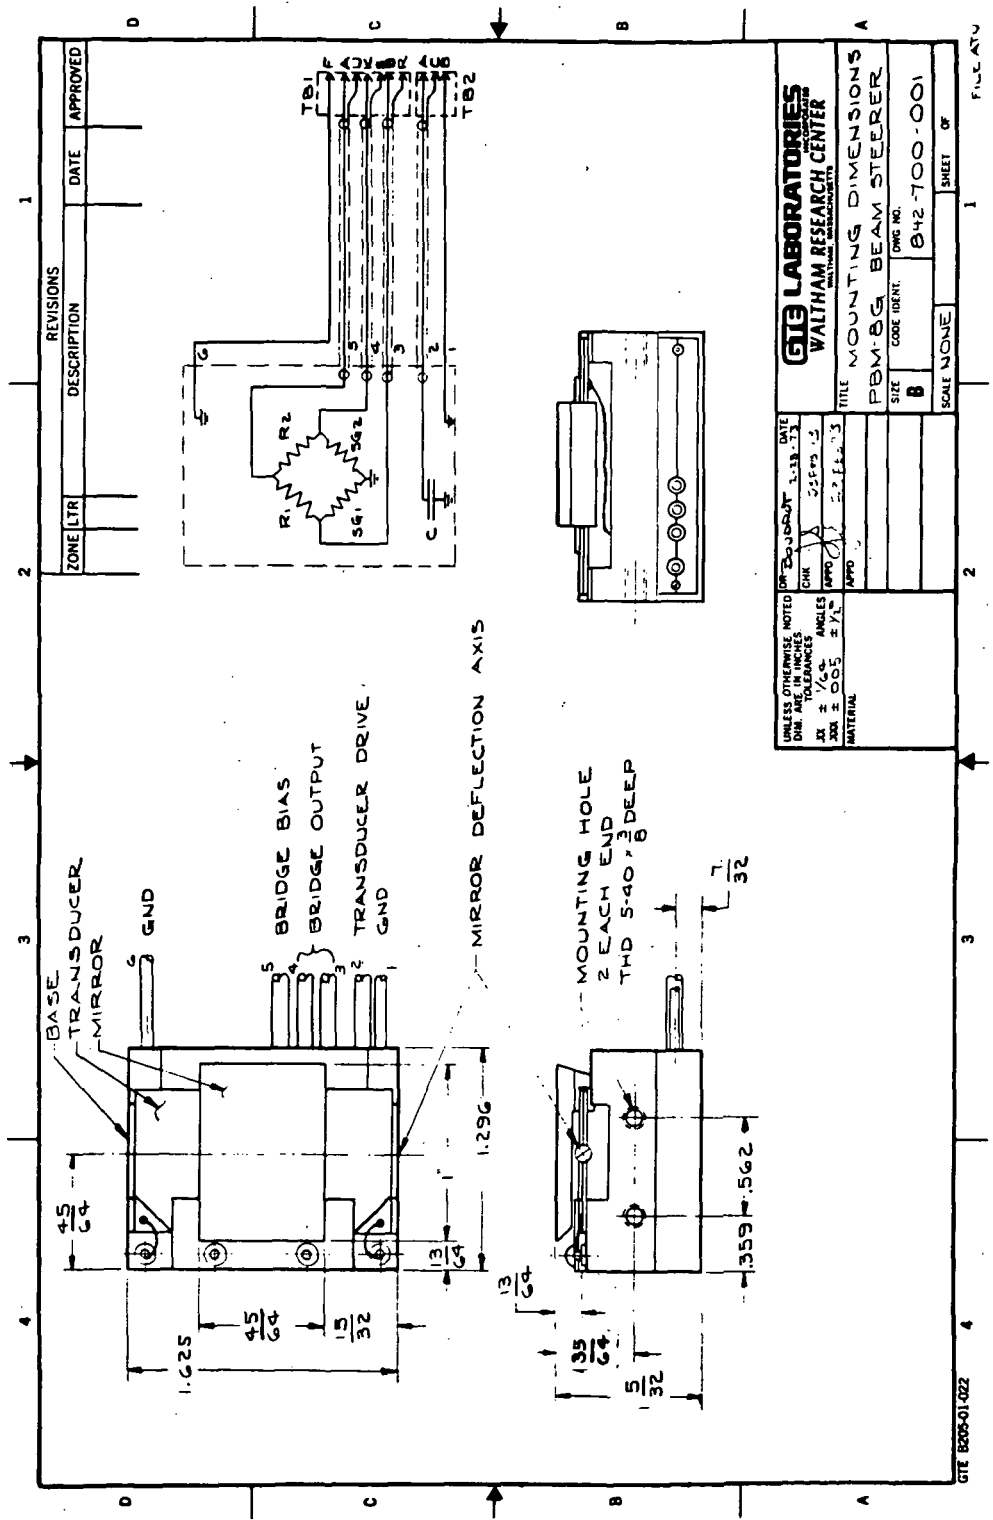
Mounting Dimensions and Electrical Connections for PBM-86 Beam Steerer
